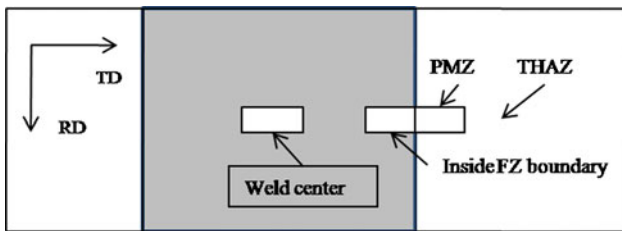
Schematic diagram of weld specimen (top surface) showing locations of EBSD measurements made: weld interior, inside FZ boundary, and PMZ
